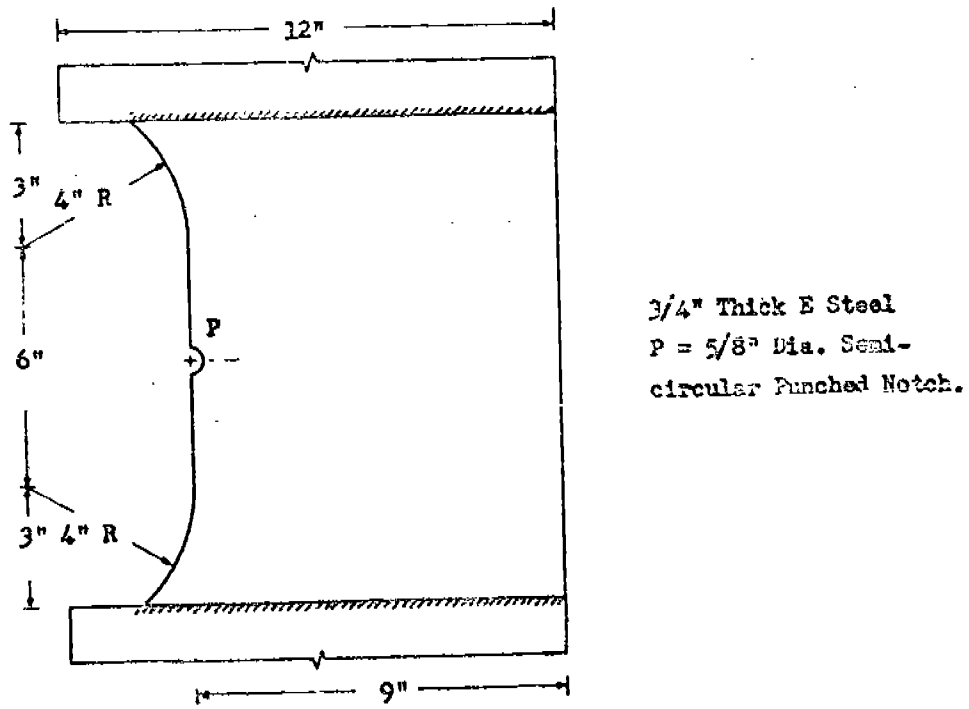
DETAILS OF SPECIAL SPECIMEN FOR ECCENTRIC LOADING
